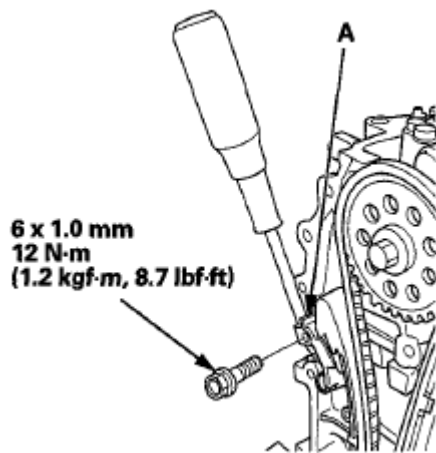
Identifying Cam Chain Tensioner With Torque Specifications And Cam Chain Guide
